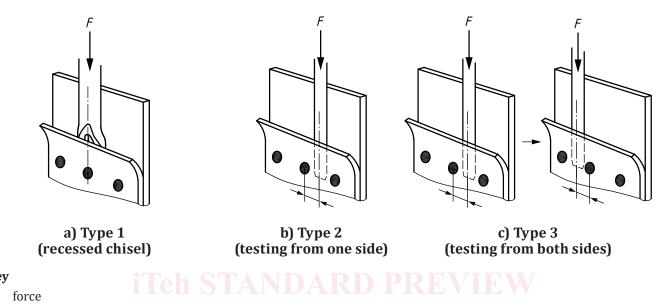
Chisel testing of resistance spot and projection welded joints
